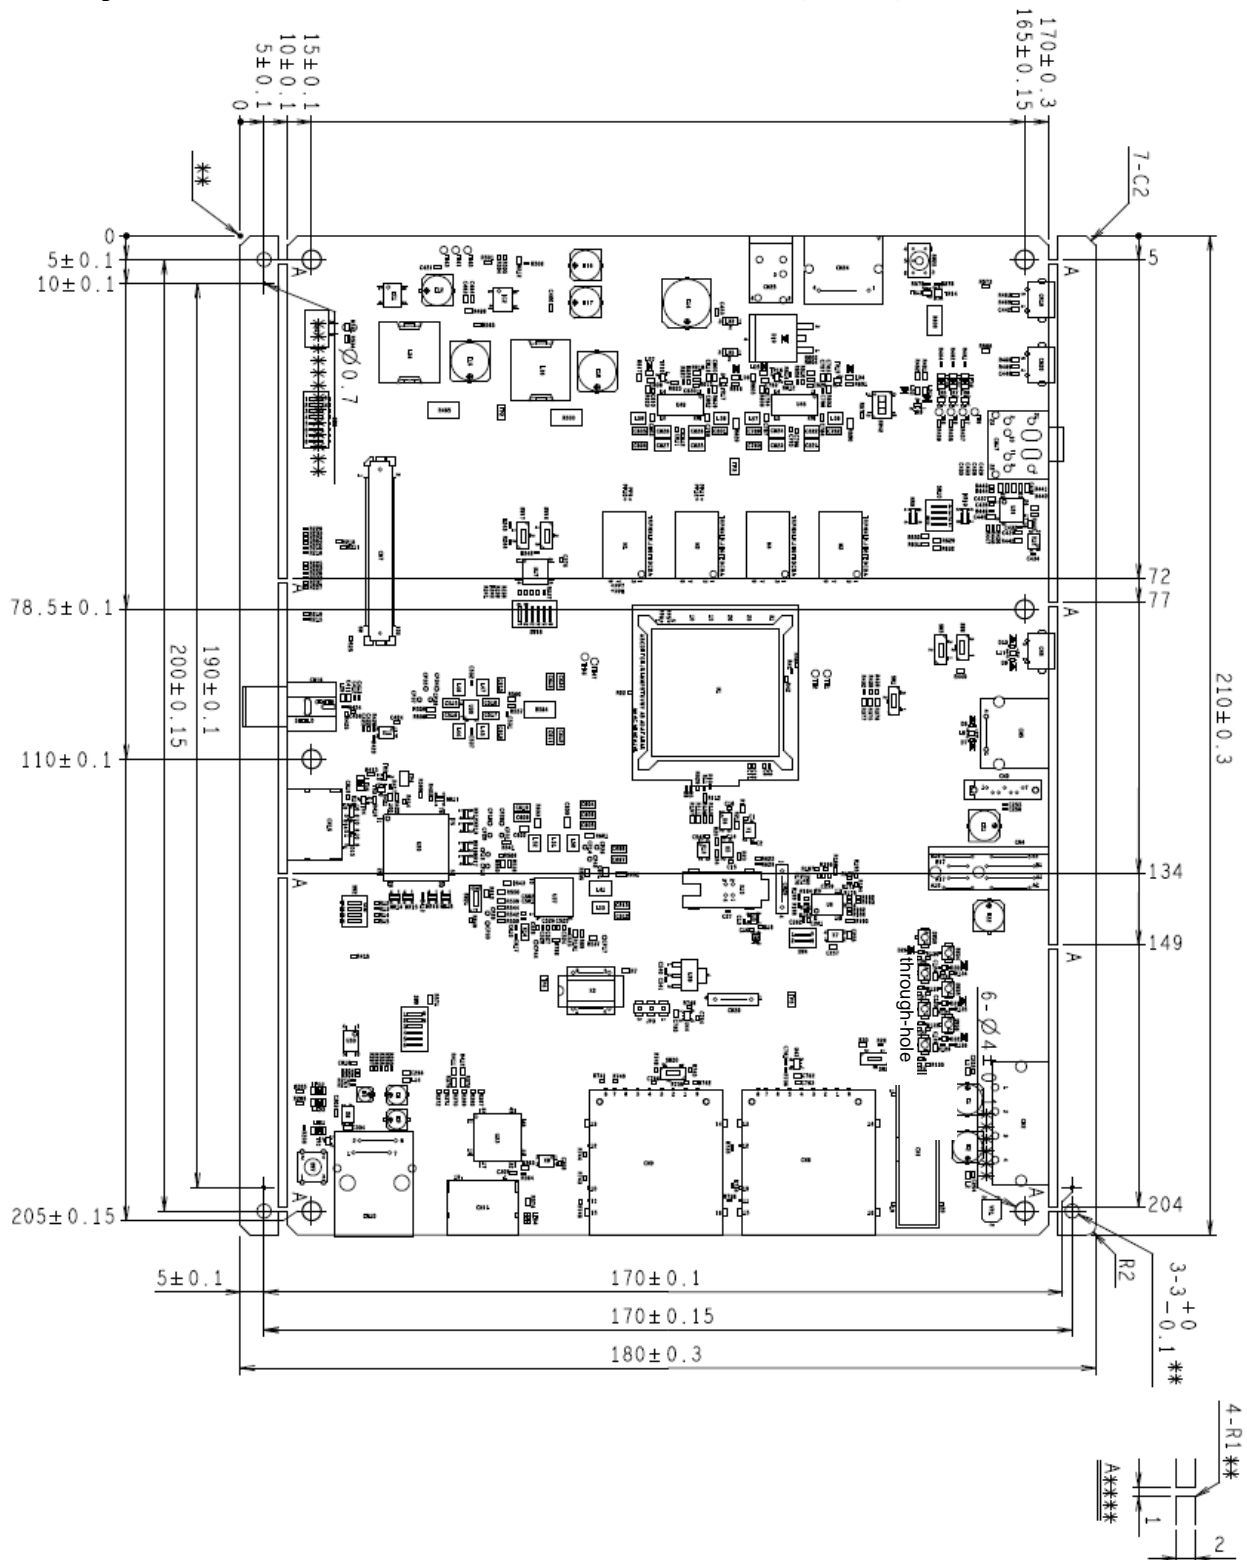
External Dimensions and Hole Locations of the GOSE Board
